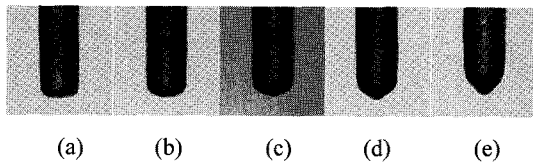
Shape of tool electrode after machining micro groove with different depth of layer (a) d=5μm, (b) d=10μm, (c) d=20μm, (d) d=40μm and (e) d=80μm
